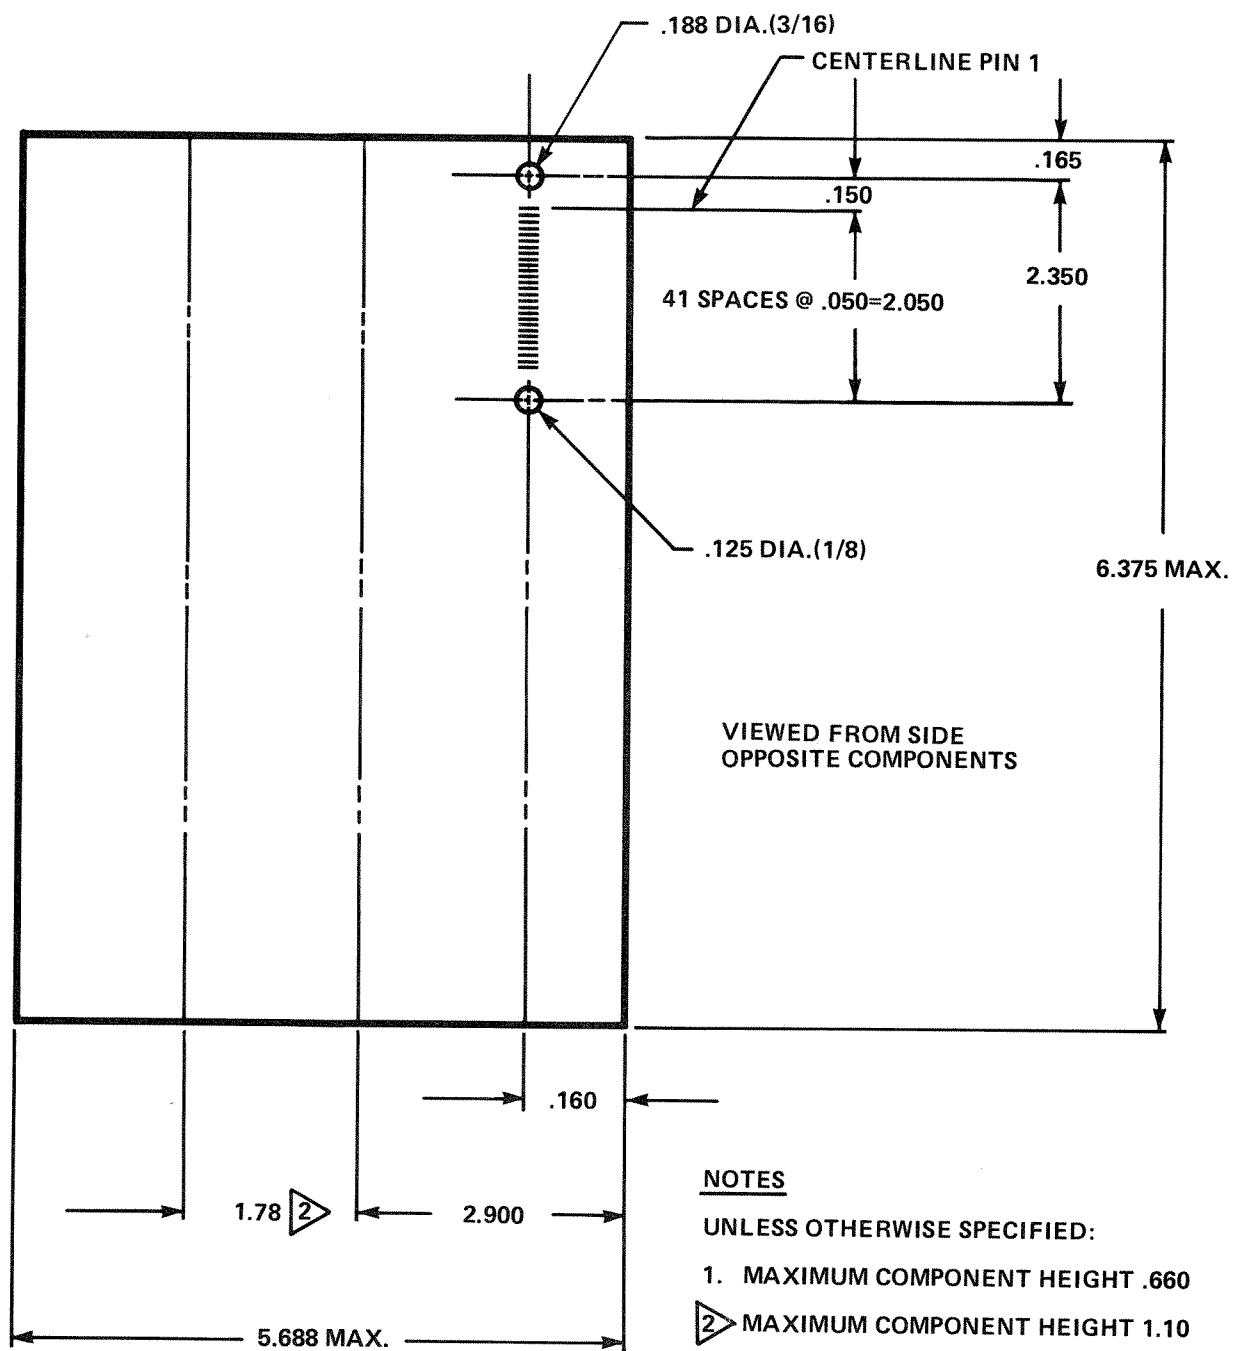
EXPANSION INTERFACE "ADD-ON" BOARD OUTLINE DIMENSIONS
